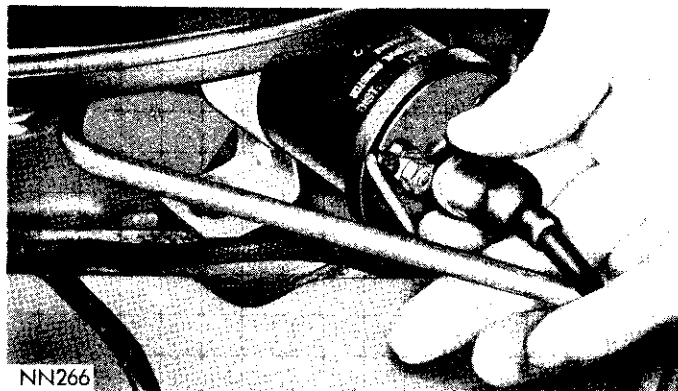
Installing Secondary Cable and Nipple at Coil Tower
